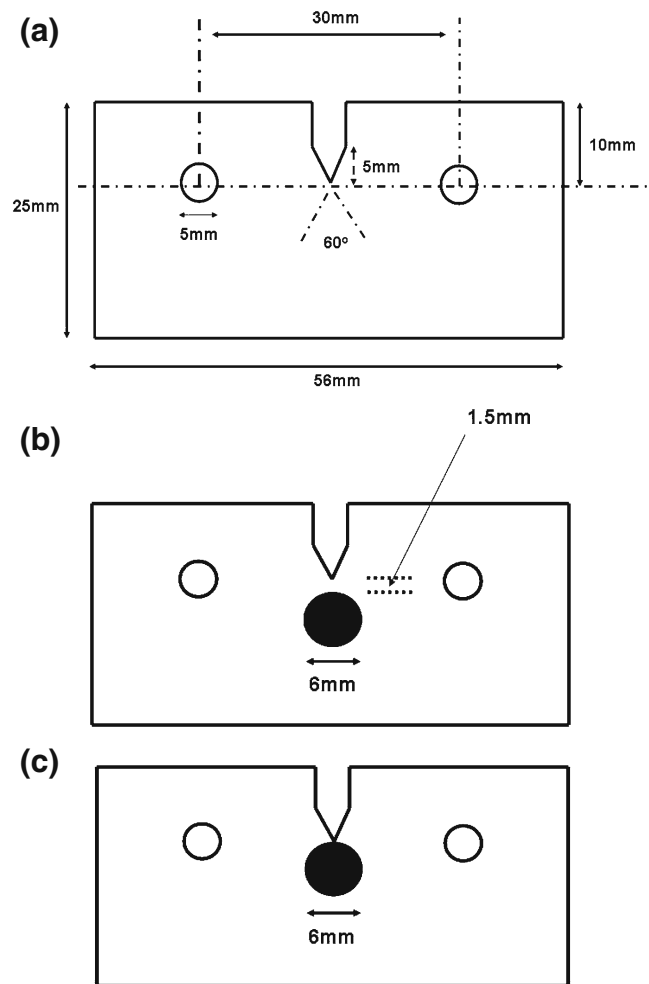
Schematics of DP600 fracture specimens. (a) base material with no spot weld, loading occurs along the dot-dashed line through the loading pin holes; (b) and (c) 1–2 mm-thick DP600 coupon with 5 mm notch and loading pin holes. (b) spot welded specimen with spot weld (solid circle) positioned 1.5 mm below the notch tip; (c) spot welded specimen with notch tip touching the outer perimeter of the spot weld (solid circle). Each spot weld had a 6 mm nominal diameter, as indicated
